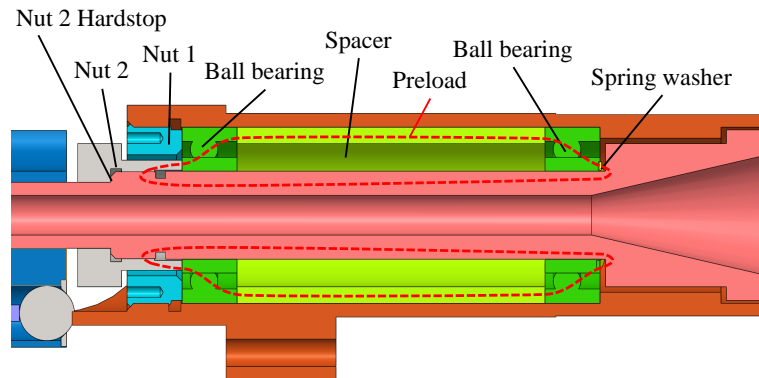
Preload of the alpha axis bearings. Nut 1 secures the spacer and the outer rings of the bearings to the chassis. Nut 2 is locked against a hardstop on the hollow shaft and creates the preload via the inner rings of the bearings and the spring washer.
